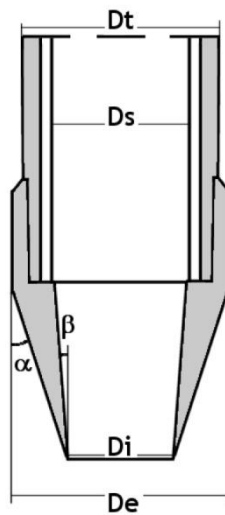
Definition of the geometric parameters of a tube sampler
